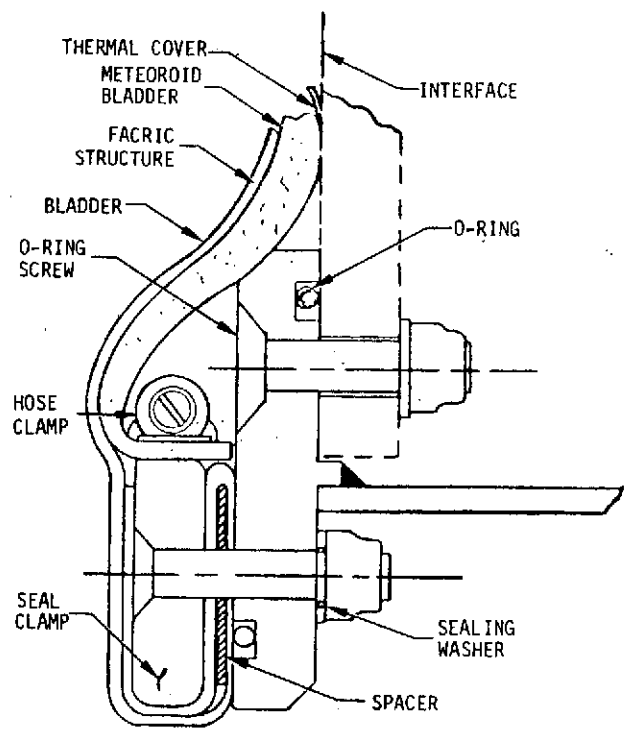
SORTIE LAB FLEXIBLE TUNNEL CONFIGURATION
